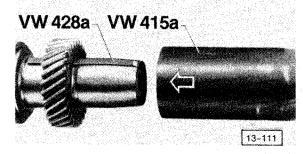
Distributor drive gear/crankshaft timing gear, installing
